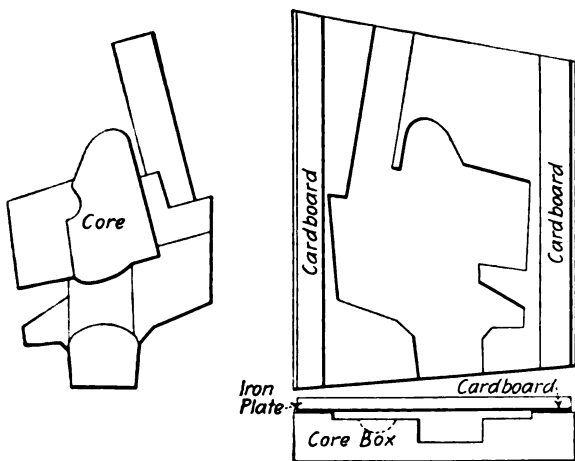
A PISTOL CORE FIG. 2. MAKING THE CAST
